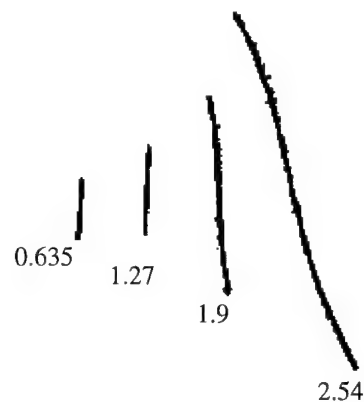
Hocking FastScan Results for Cracks Under Flush-Head Rivets (Millimeters)
